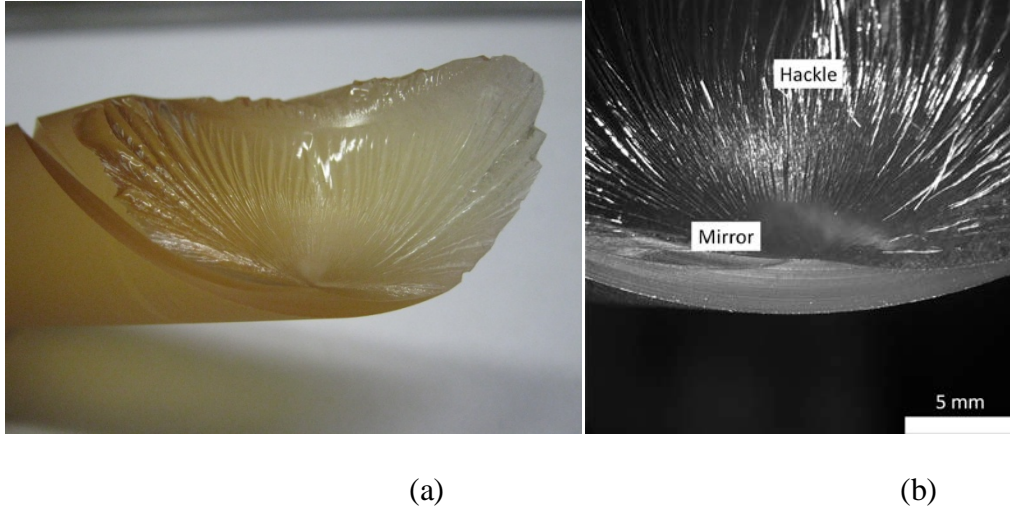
Optical microscope images of the fracture surface of sample GB1-6, a mixed mode sample (pitch angle = 36°) fractured without fatigue.
